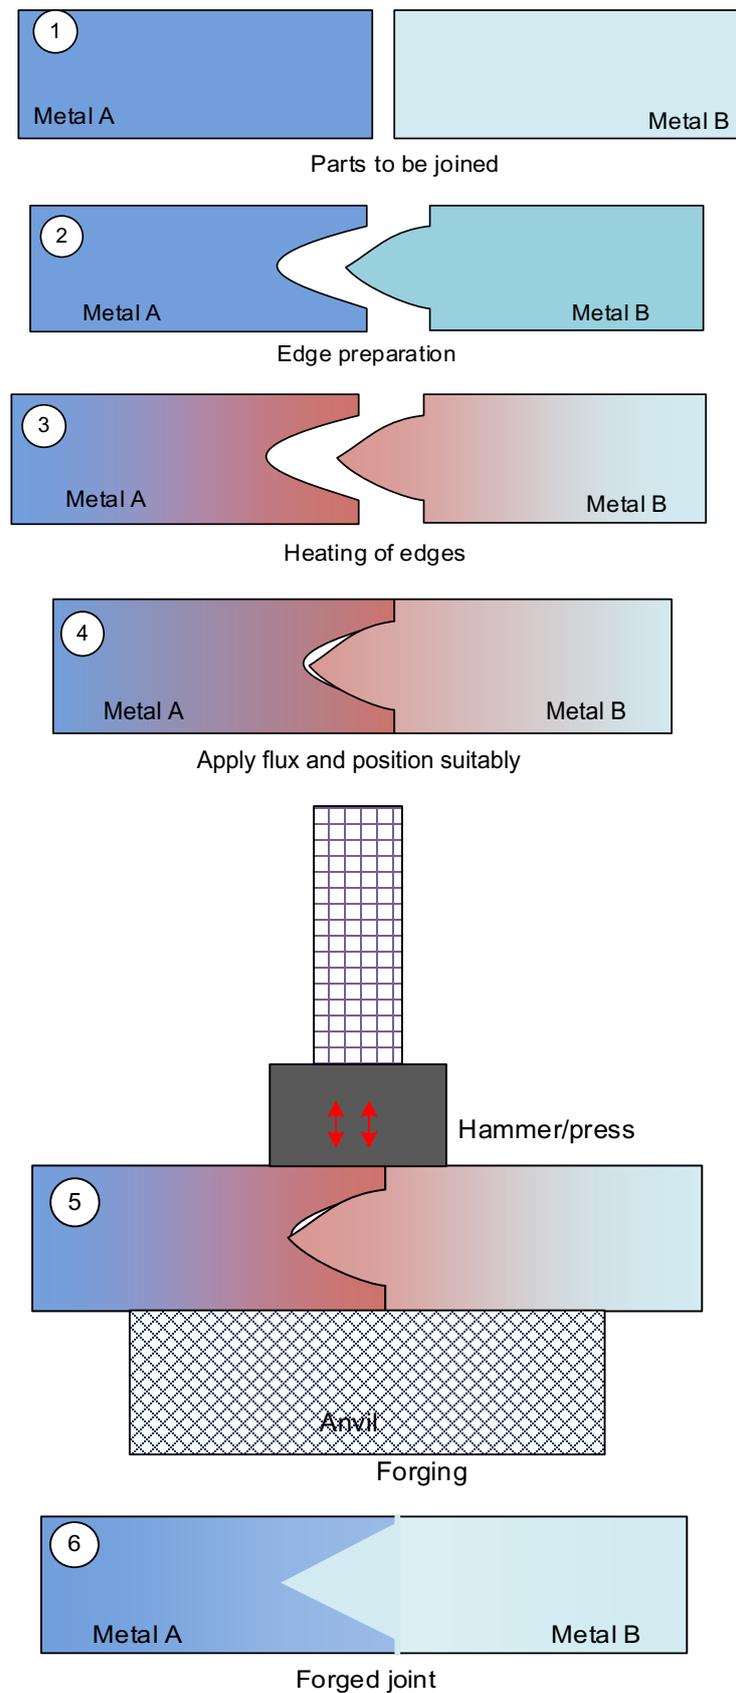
Schematic diagram showing steps of forge welding
